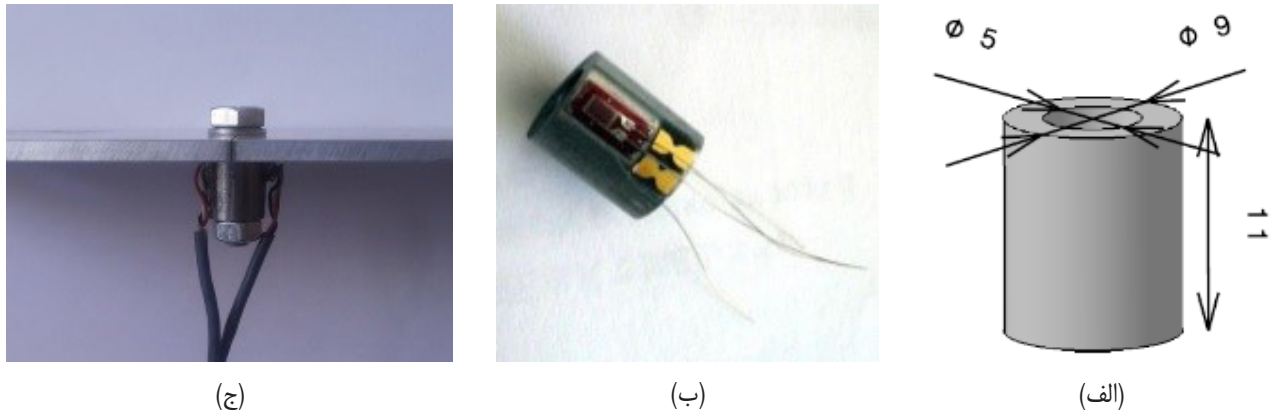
Strain gauges attached to the bush and steel bush dimensions (mm).
